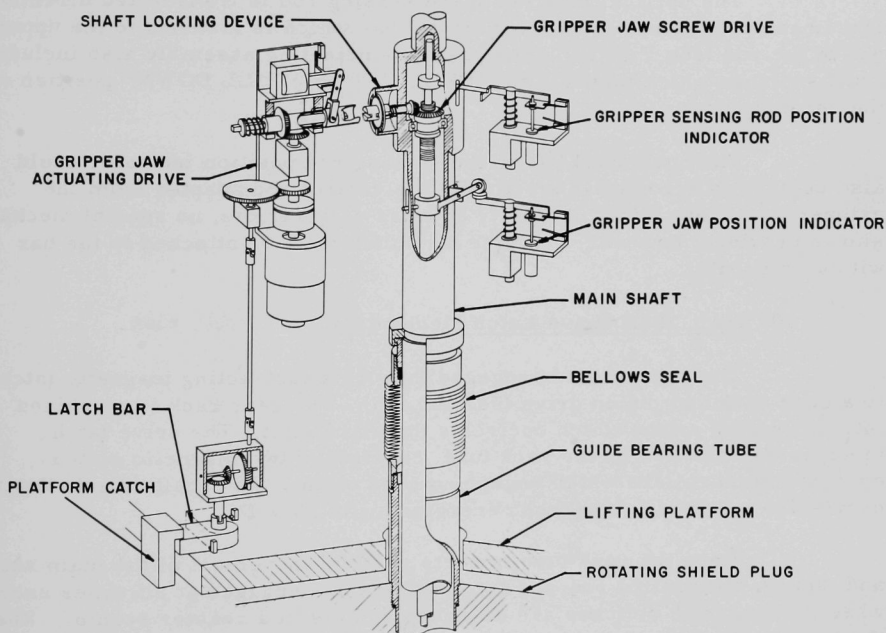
Control Rod Gripper Jaw Drive and Lifting Platform Mechanical Interlock
